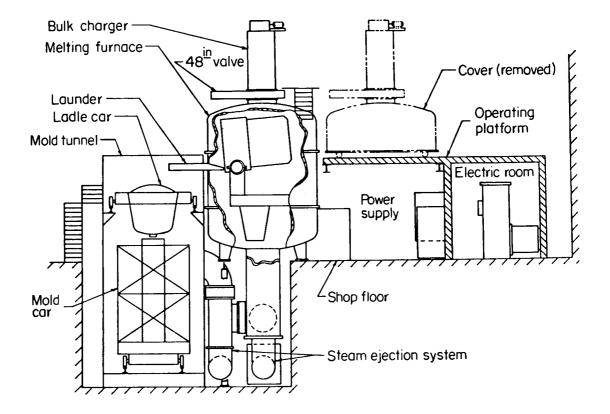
SCHEMATIC DRAWING OF A 30,000-POUND VACUUM INDUCTION MELTING FURNACE
